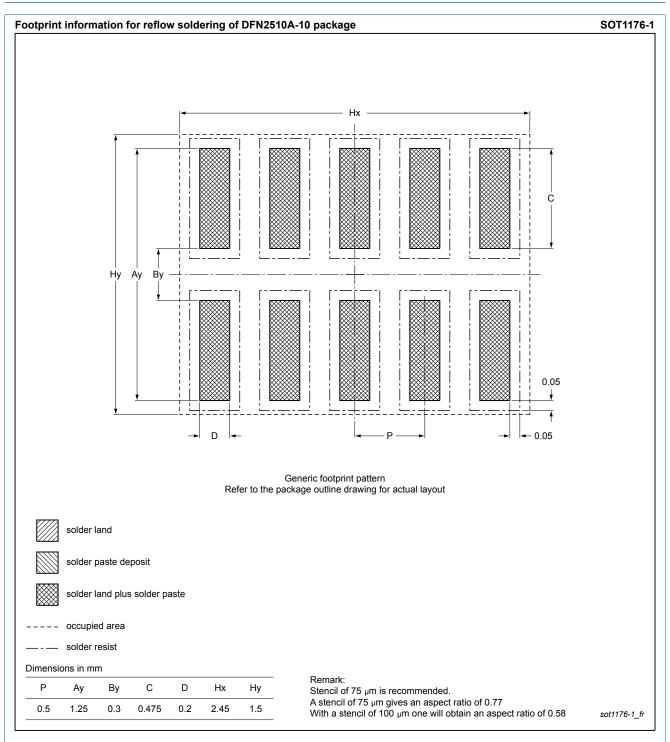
Reflow soldering footprint for DFN2510A-10 (SOT1176-1)
